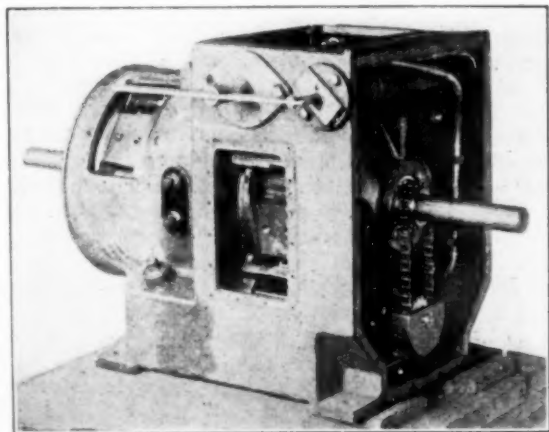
OILGEAR MACHINE WITH HANDHOLE COVERS REMOVED
